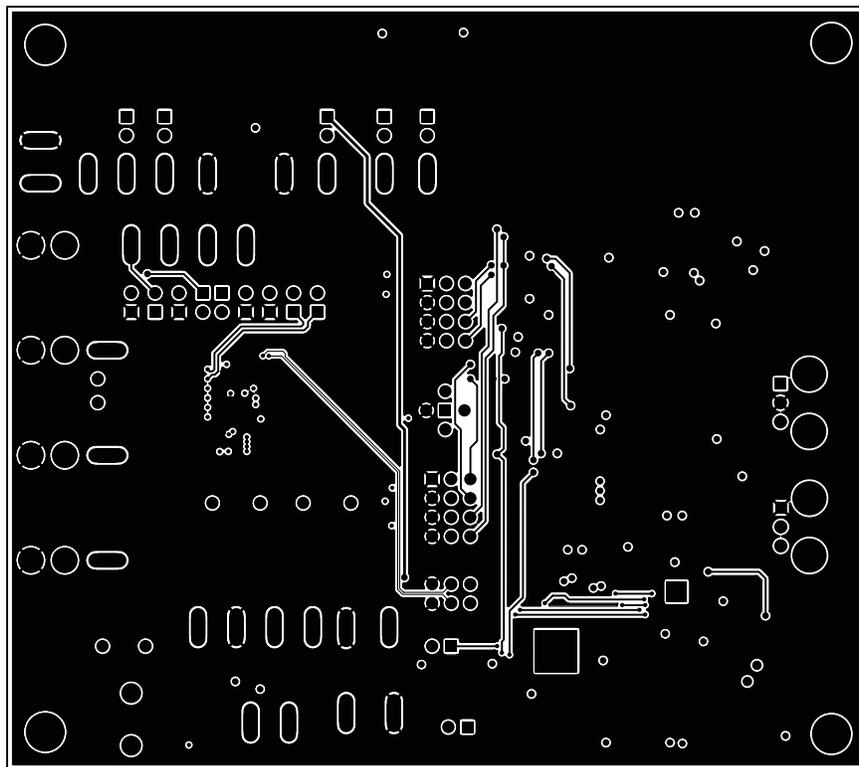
MAX9888 EV Kit PCB Layout—Solder Side
